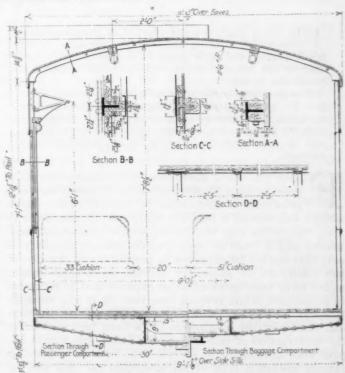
Cross-Section of the Body of a 55-Passenger Motor
